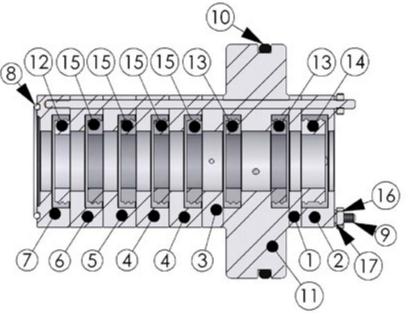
Steeple Cylinder Pressure Packing Exploded View
